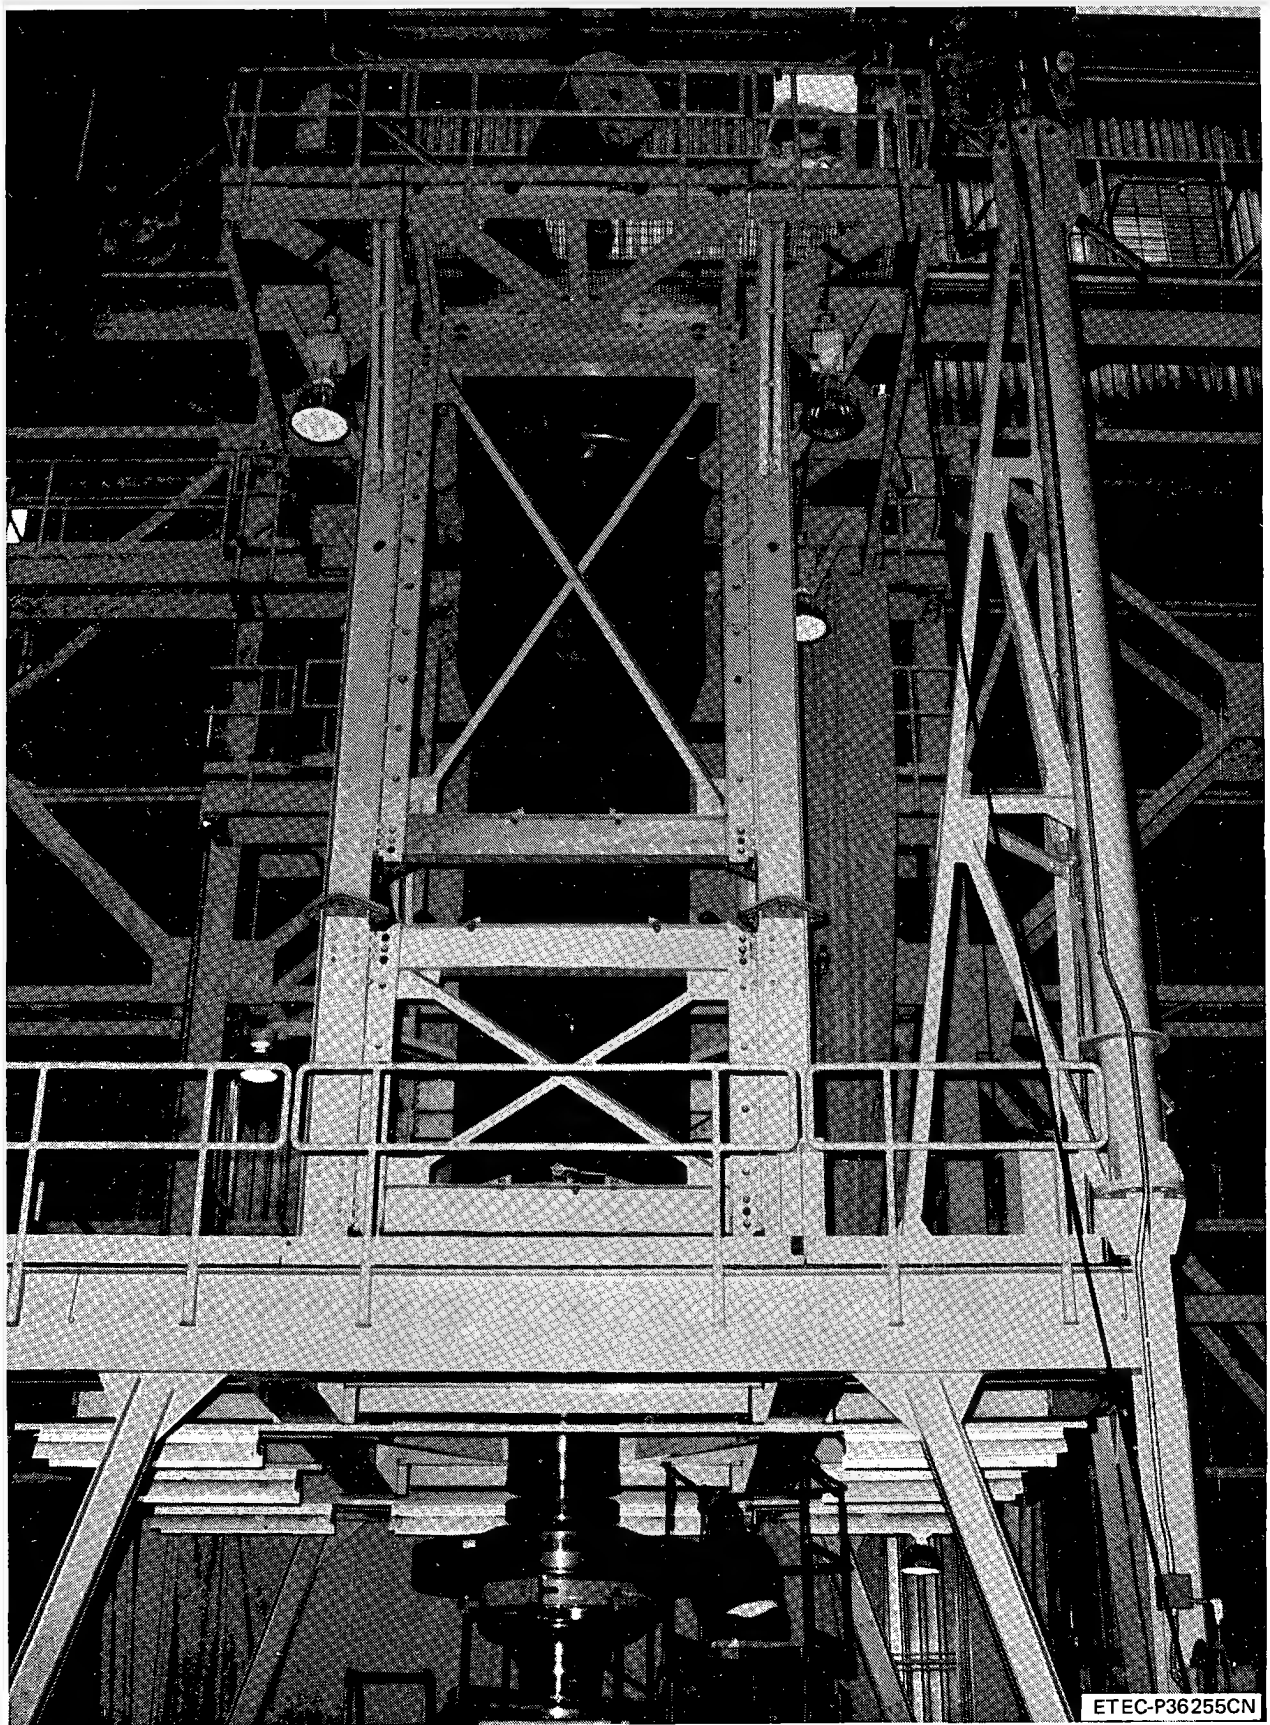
Shield Plug/Support Cylinder in Assembly Stand
